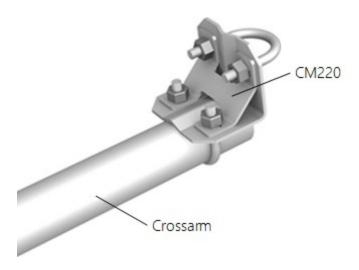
CM220 Right Angle Mounting Kit mounted to a crossarm
